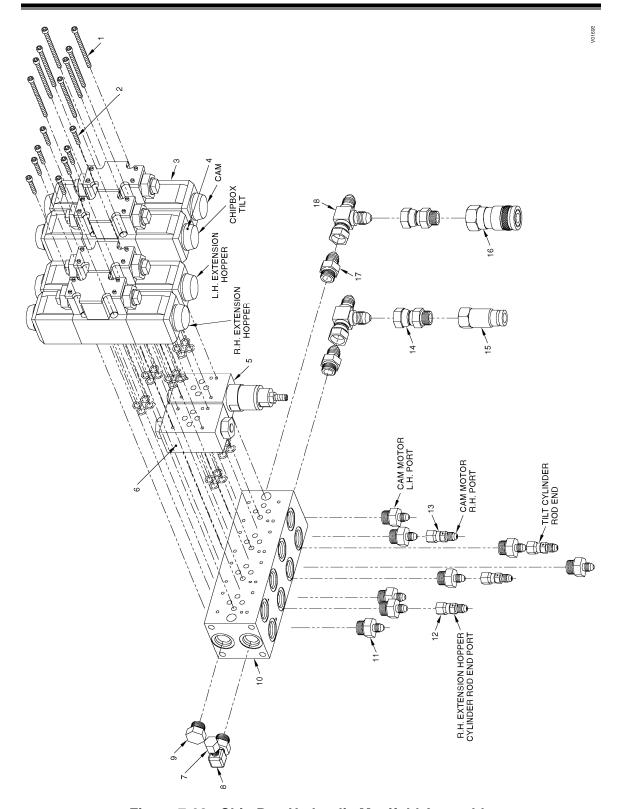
Chip Box Hydraulic Manifold Assembly
